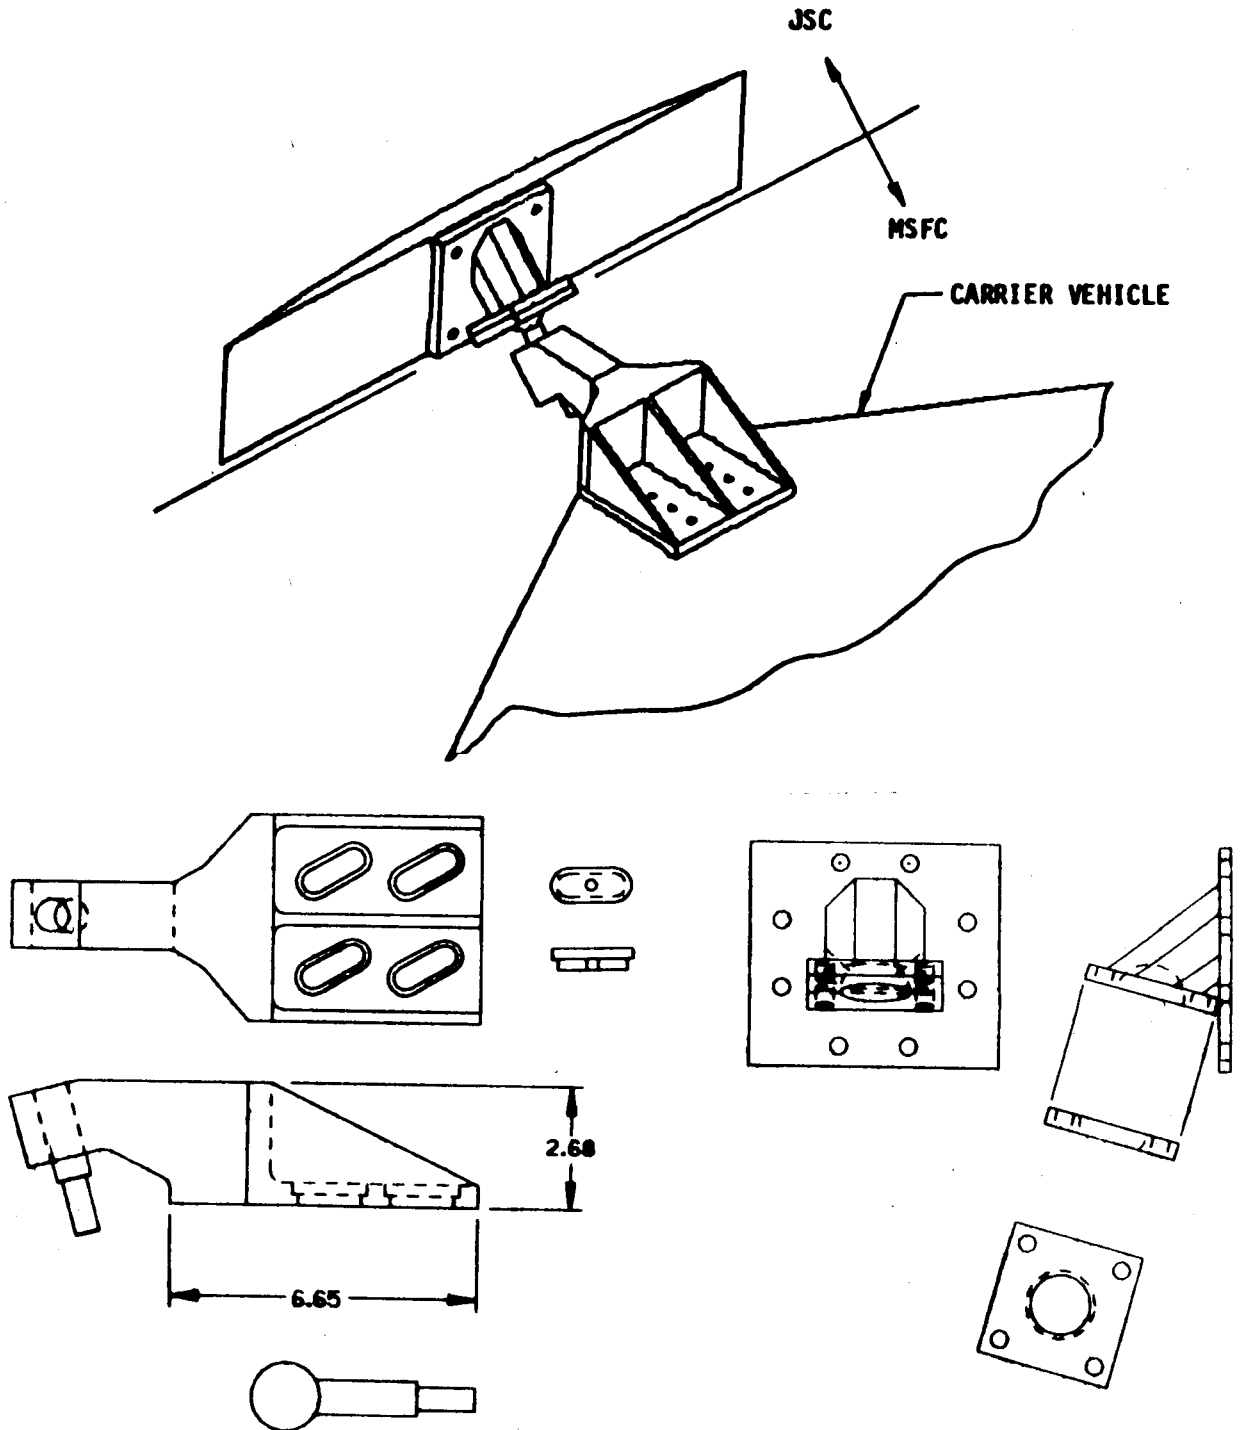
AEROBRAKE ATTACH FITTING DETAILS
